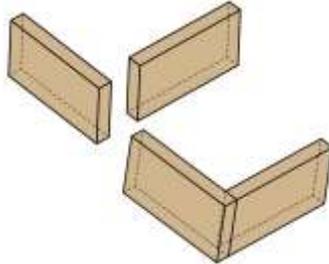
Briddle woodworking joint at a corner of frame
